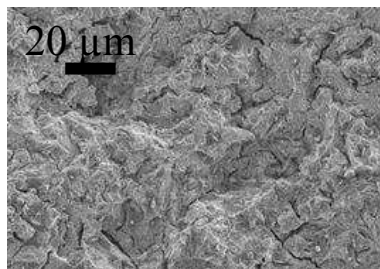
Detail of the brittle area of C110 fracture surface.
